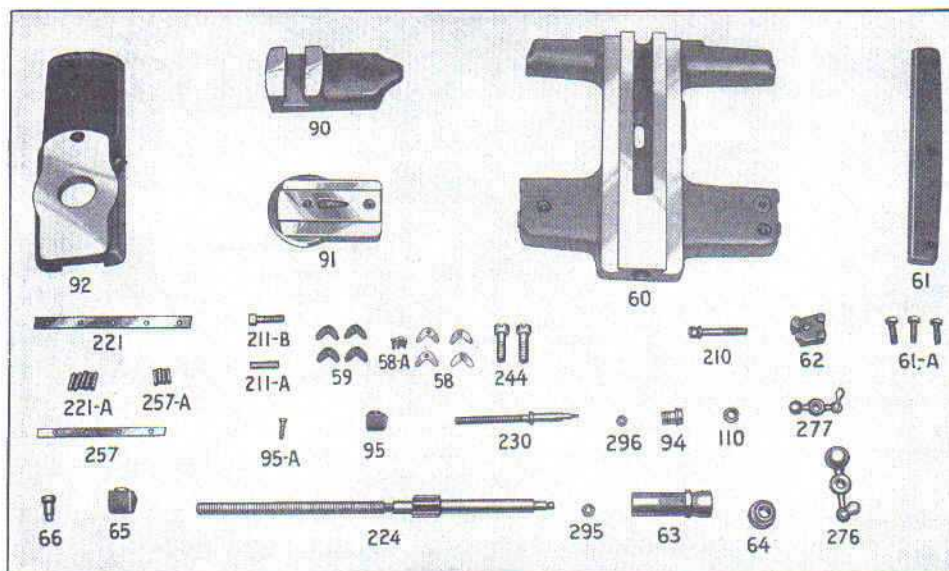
Saddle and Compound Rest Parts for Series "R" and "T" Lathes.
